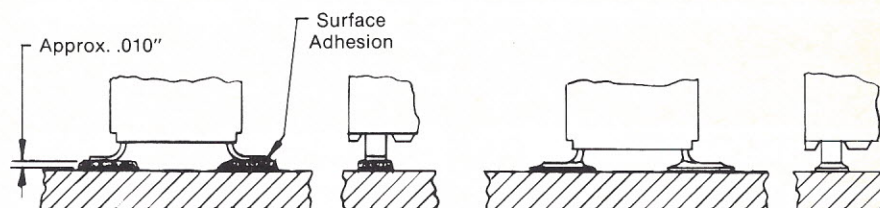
The vapor phase solder method of curing SMT boards heats evenly, minimizing board rework necessitated by solder-bridging and icicling.
